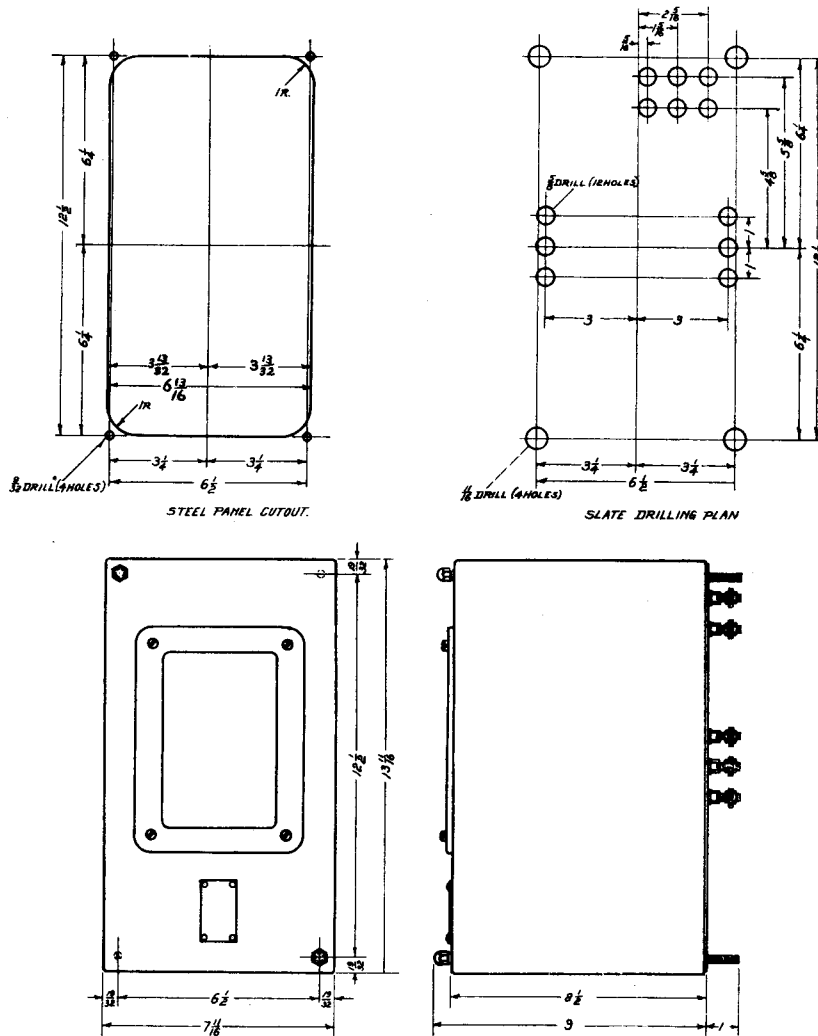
Outline Drawing and Drilling Plan for Type XT Automatic Synchronizer
